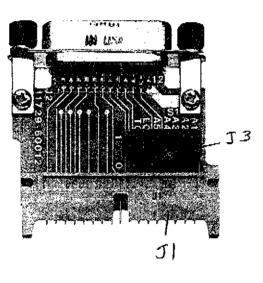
HP-IB Interconnect Board Assembly Component Locations
